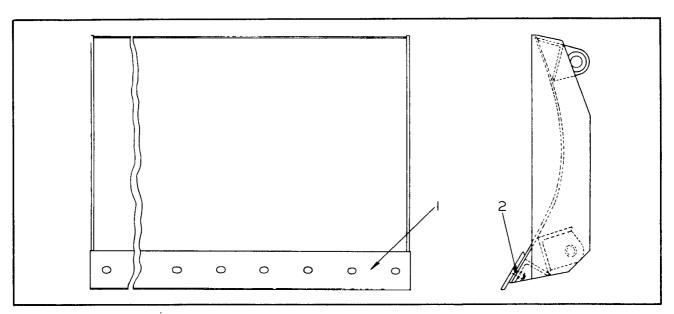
BULLDOZER MOLDBOARD ASSEMBLY
